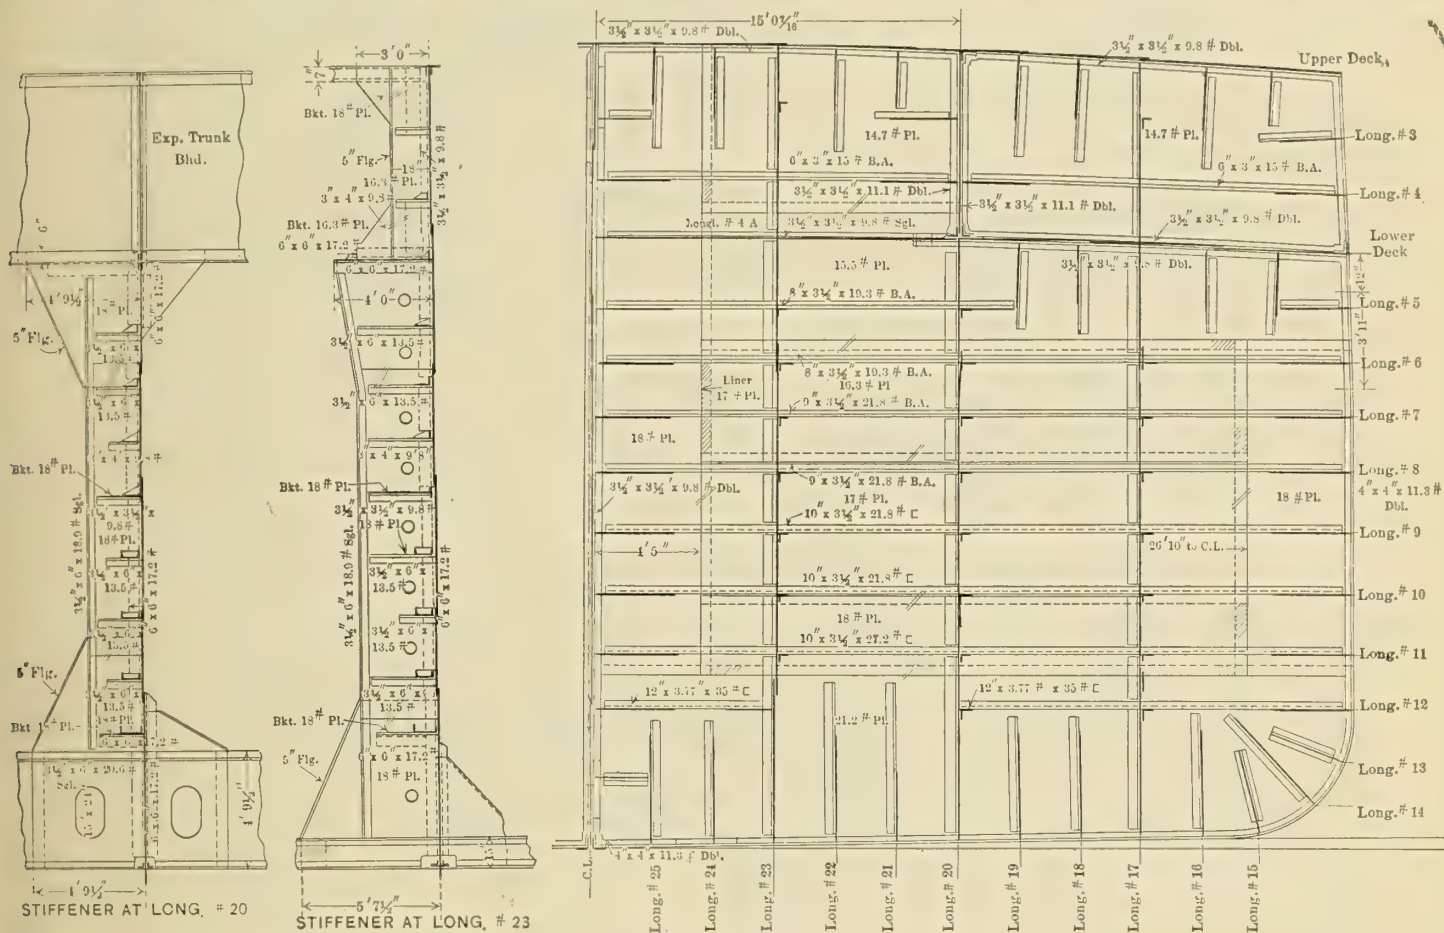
Typical Bulkhead, Showing Details of Stiffeners
